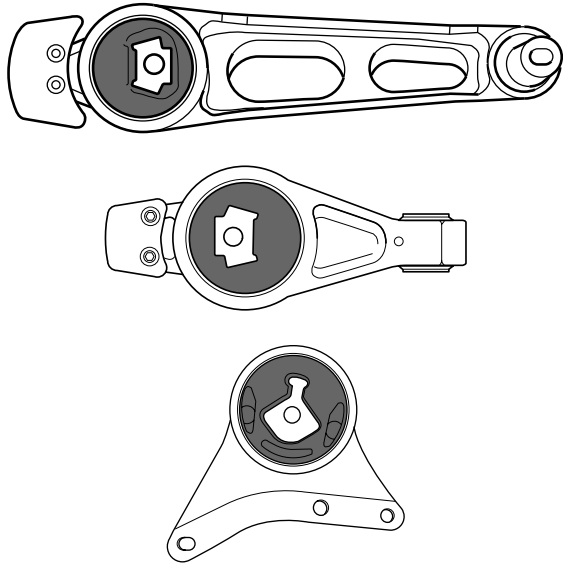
Stock engine mounts with inserts and filled voids to make them stiffer.
